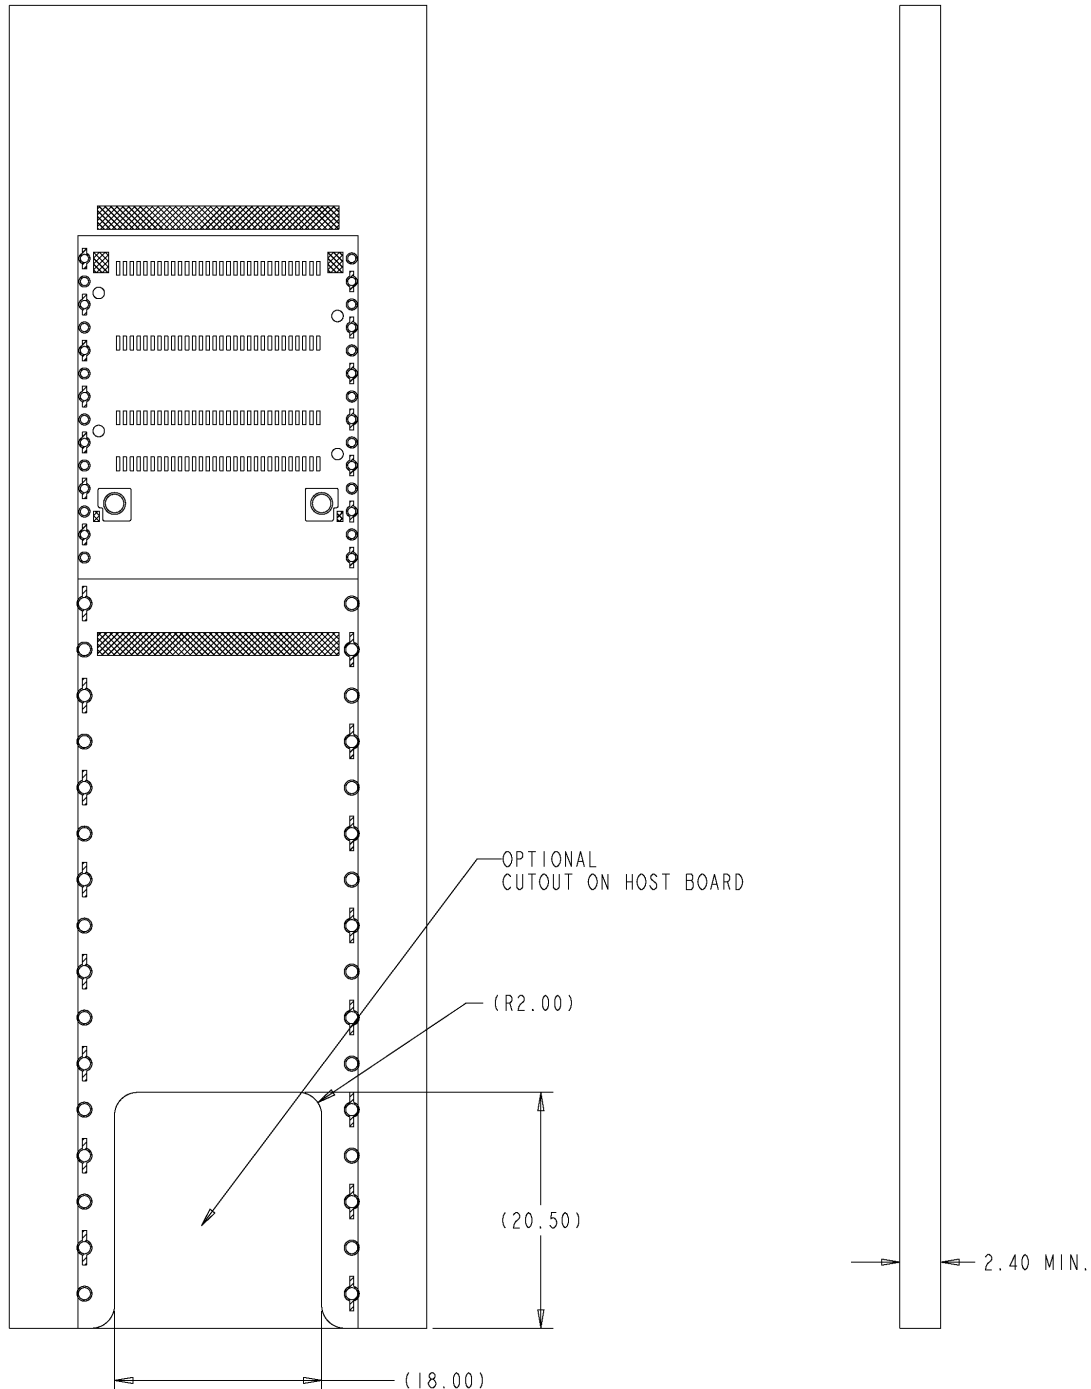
Belly to Belly 1x1 SMT PCB layout
